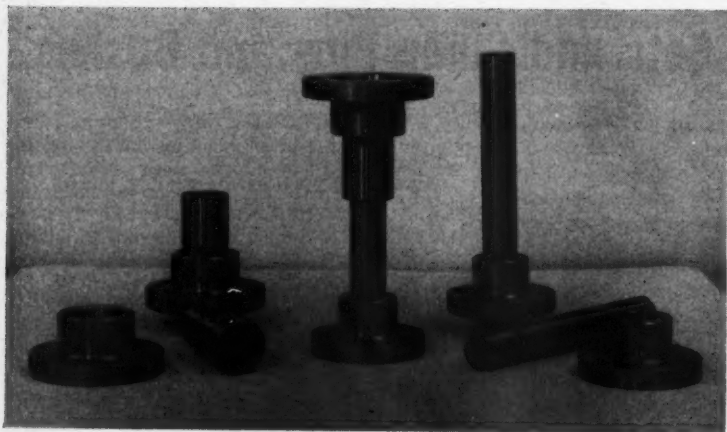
Some examples from the Winstan range of detachable guide pins and bushes for die sets
